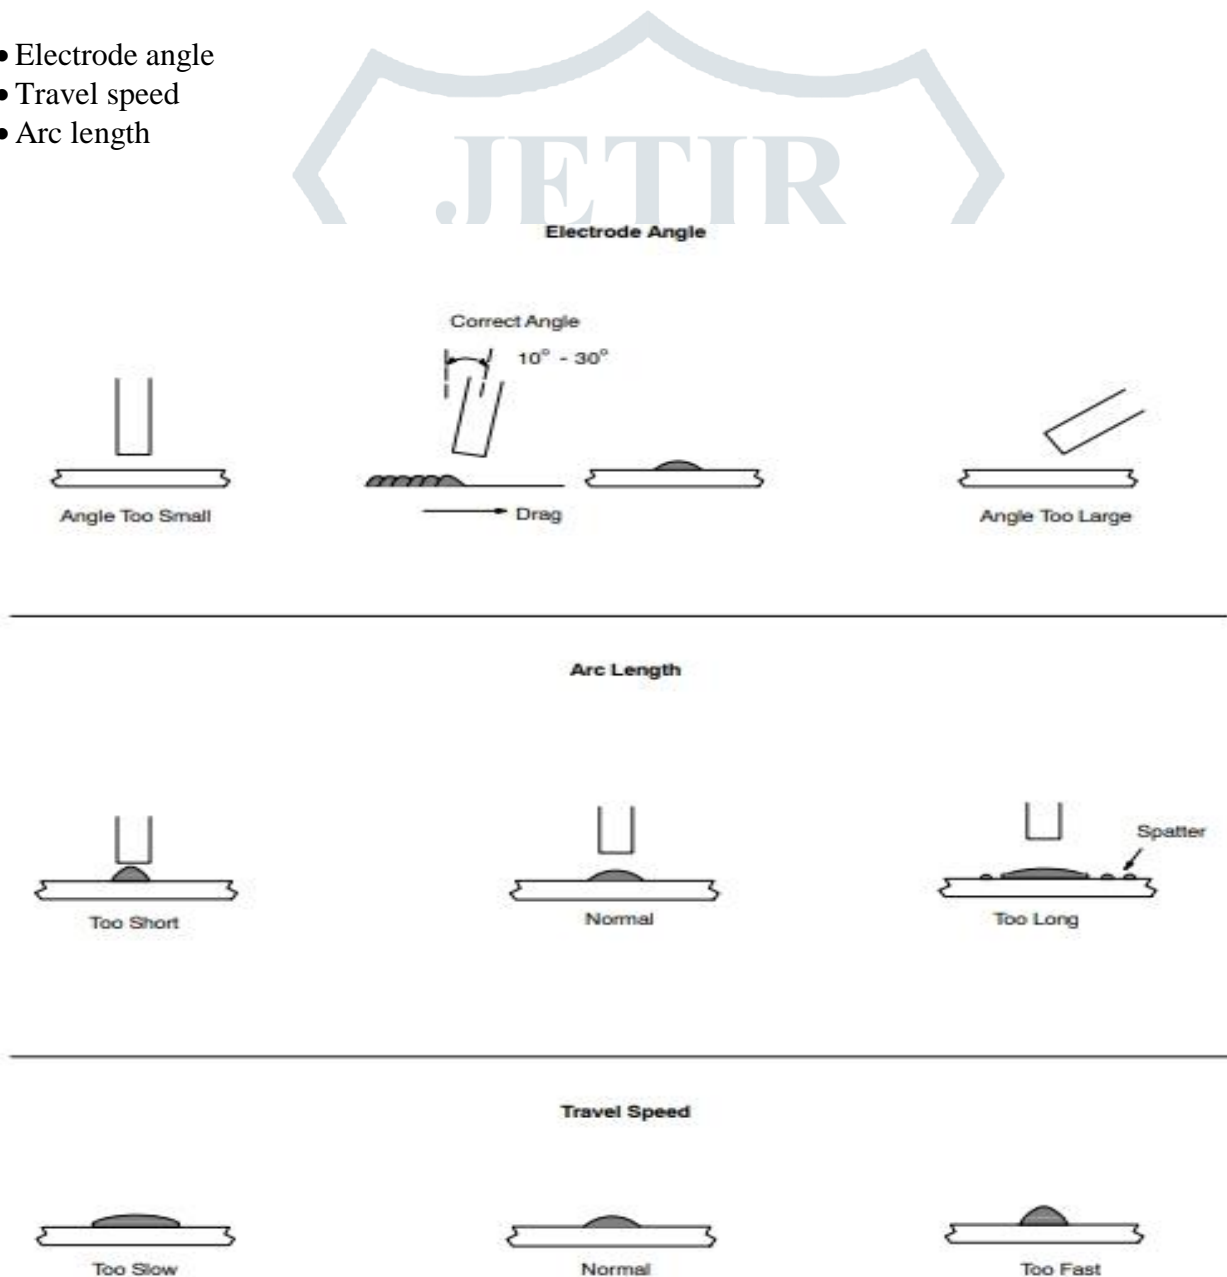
Show the Conditions that Affect Weld Bead
